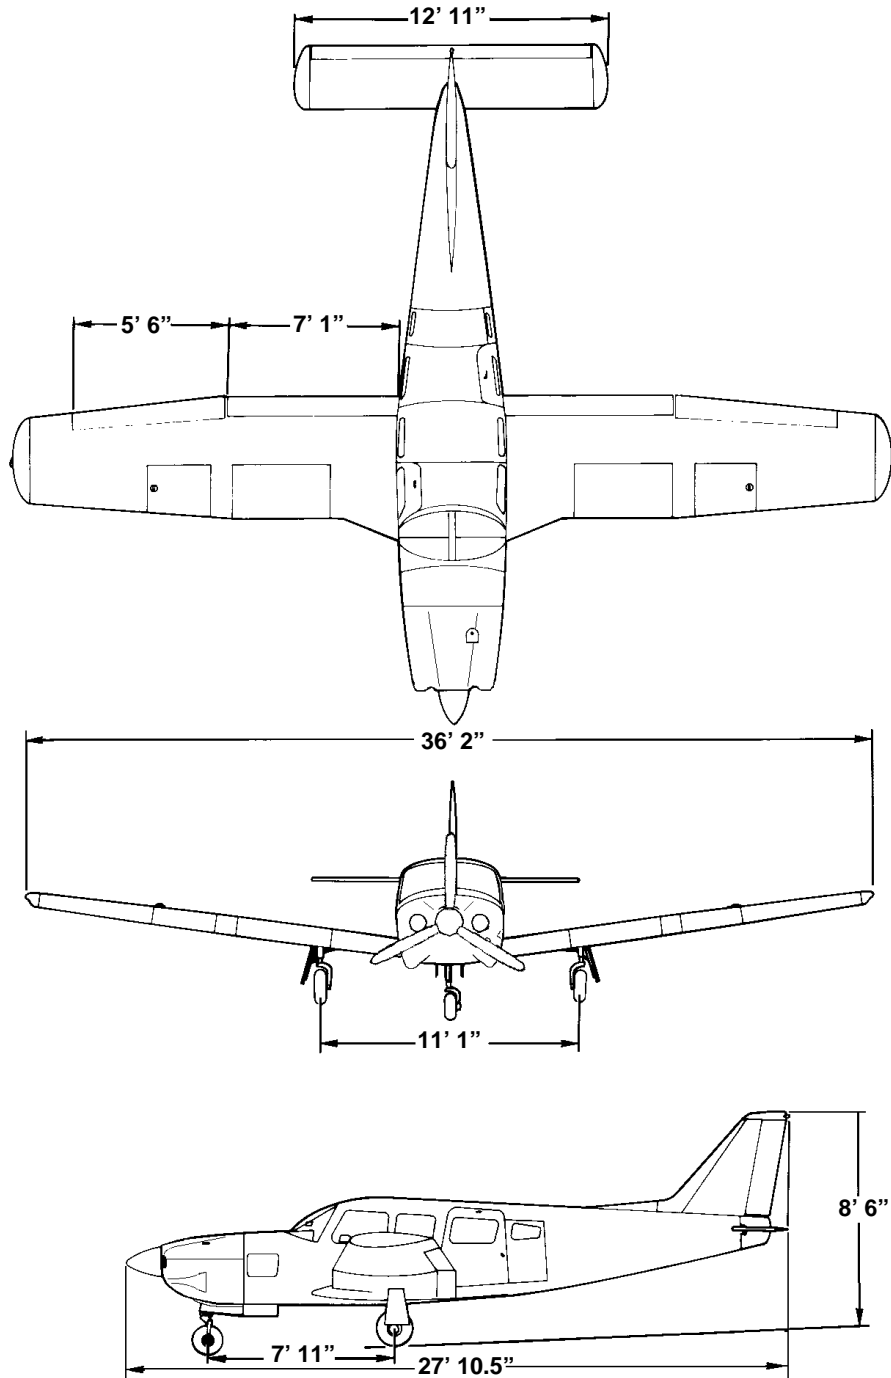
Three View of PA-32R-301 (Sheet 2 of 3)
